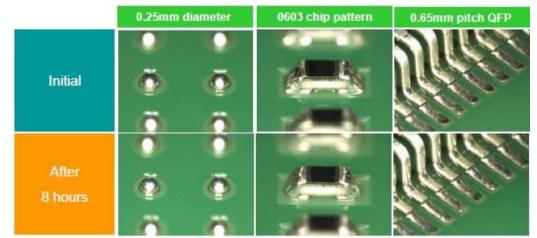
Sn58Bi paste A wetting on 0603 [0201] chip and 0.65mm pitch QFP components at time zero and after 8 hours of rolling the solder paste on the stencil before printing on the test board followed by reflow.
